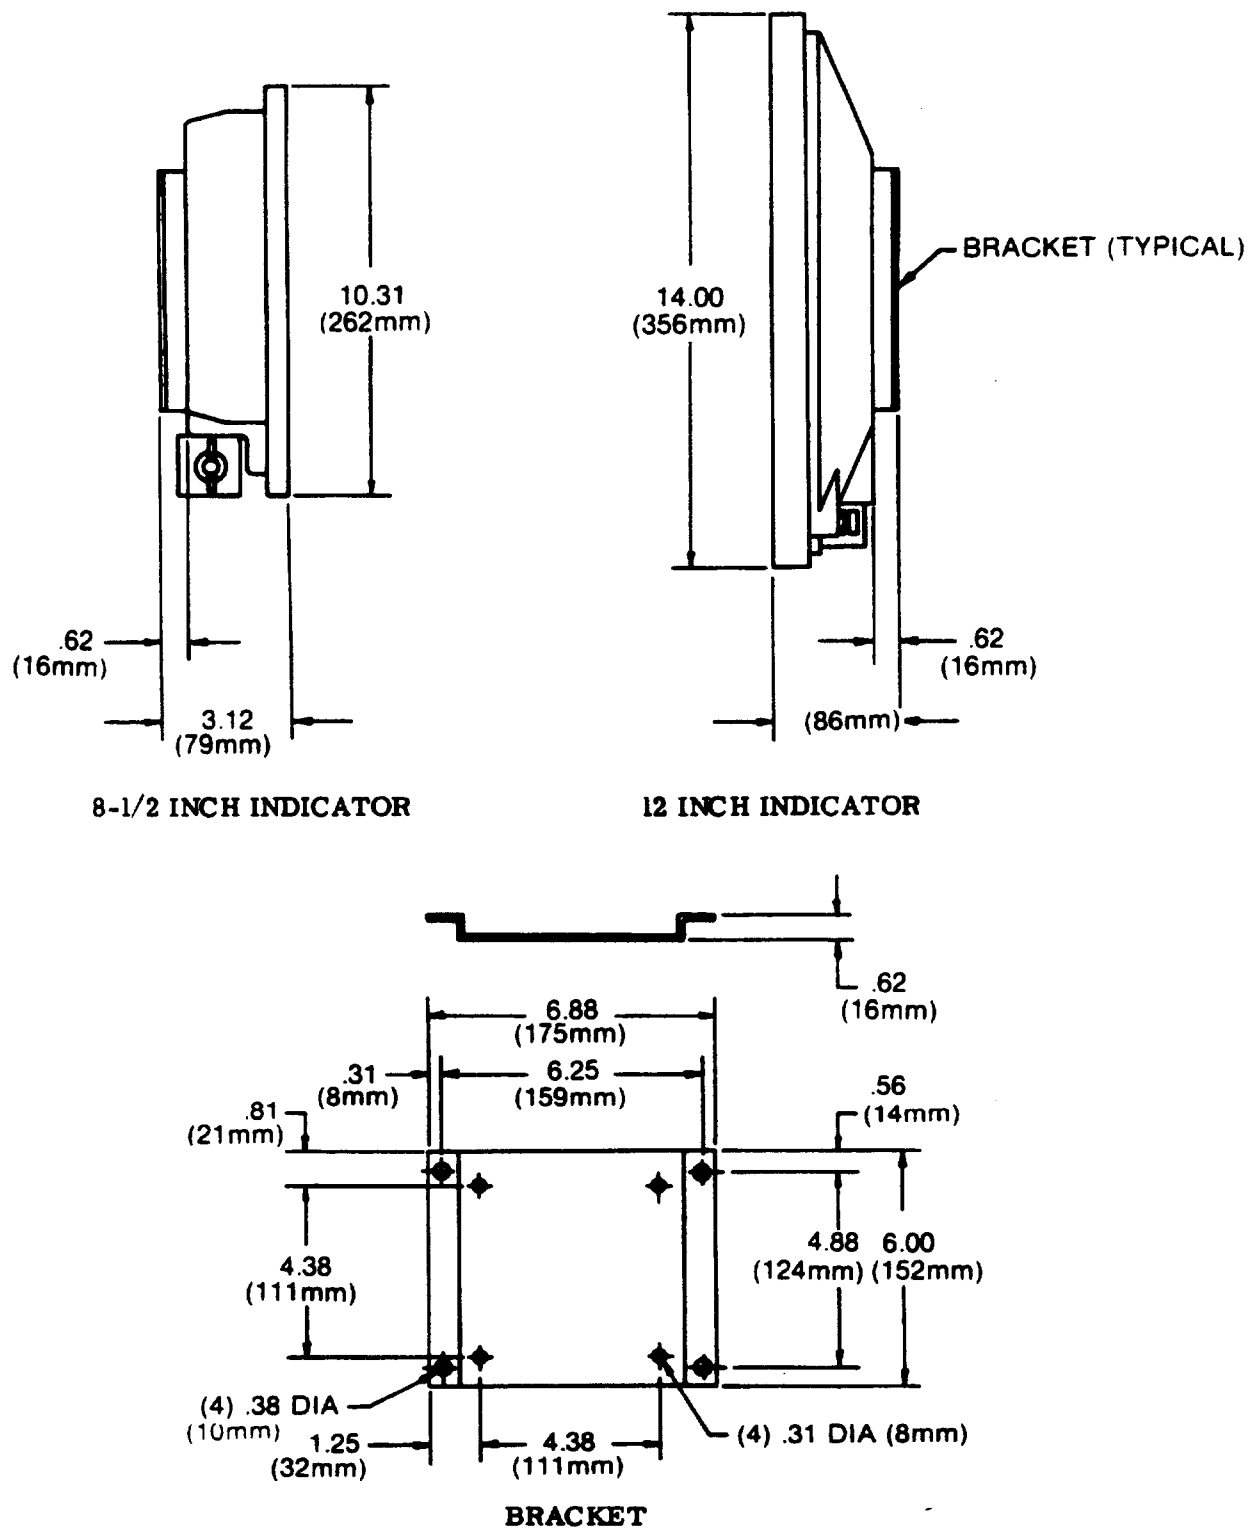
Overall Dimensions for 8-1/2 and 12 Inch Indicator and A1063A Bracket Installation
